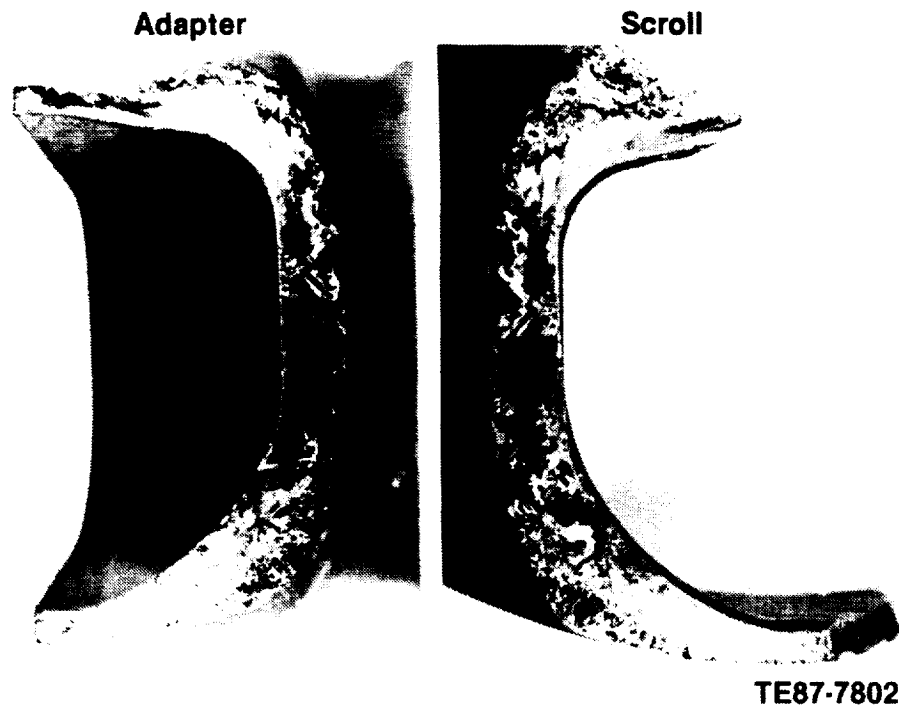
Braze joint fracture of the scroll combustor inlet adapter.
